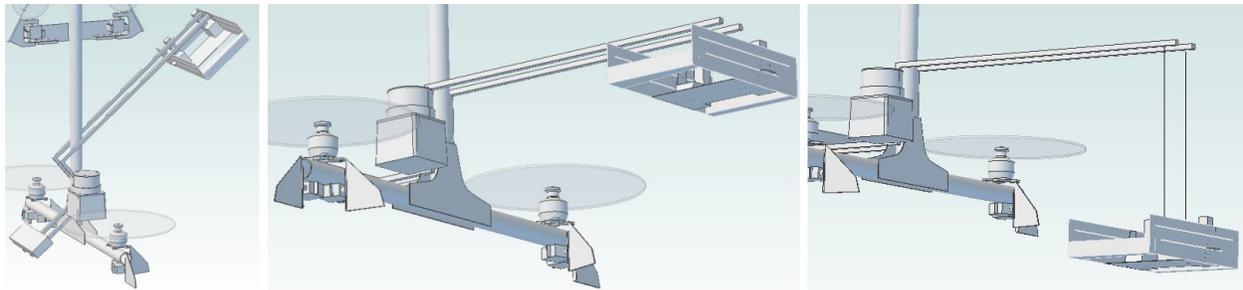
Flash drive retrieval mechanism, scoop on right. The checkerboard pattern denotes a groove that holds the decoy.
